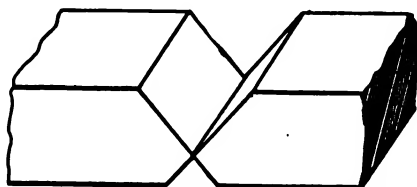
Preparation of Heavy Castings for Welding
